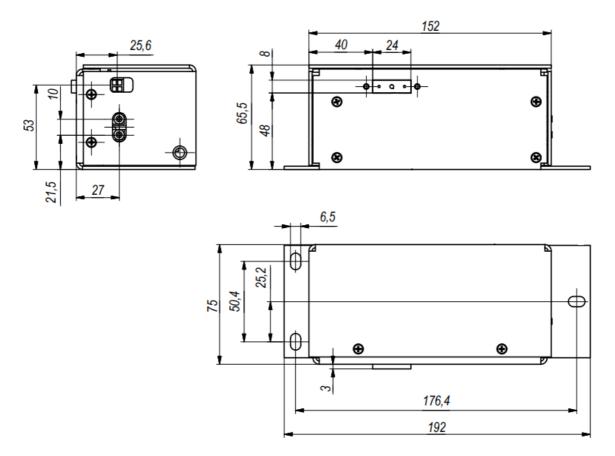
Outline drawing and dimensions of the driver with case and HV supply (-AI)
